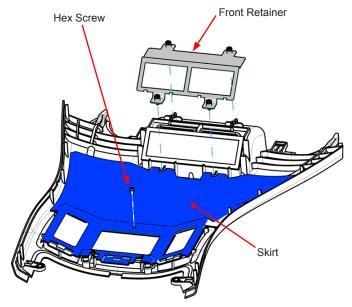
Lower Front Panel - Front Retainer and Skirt Removal
